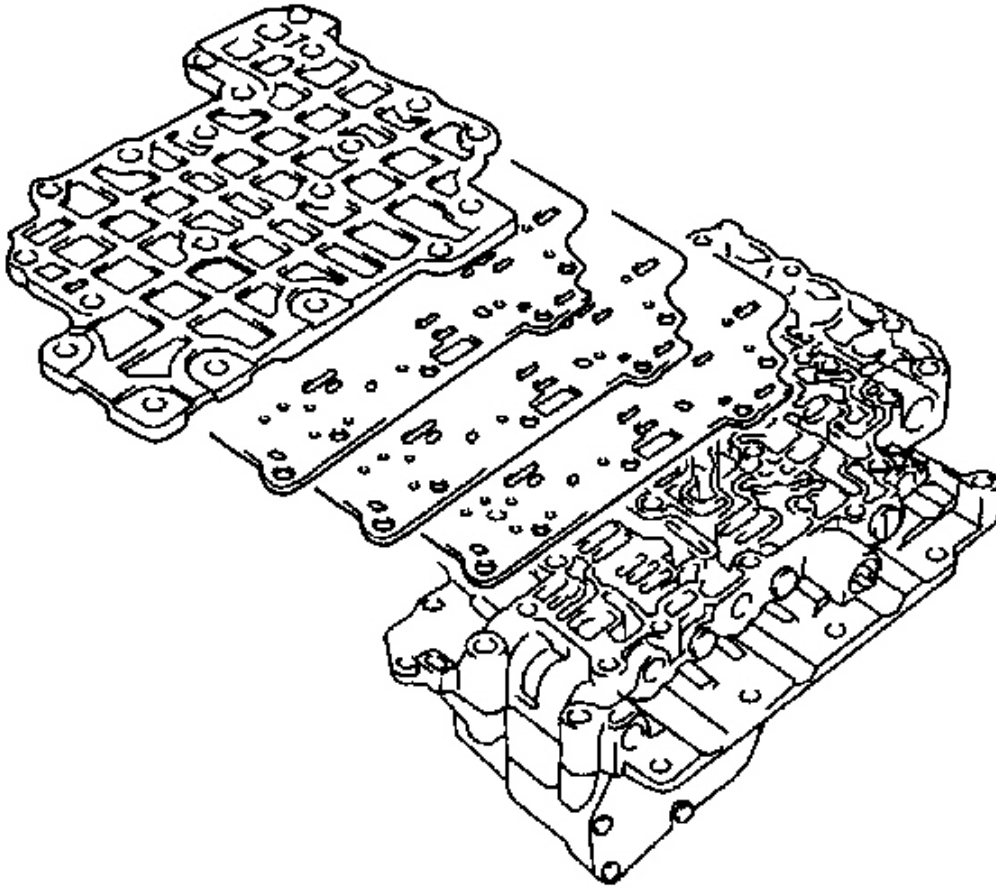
Control Valve Body, Cover, Gaskets & Plate
